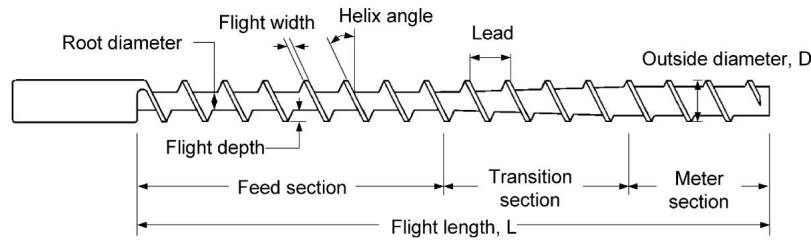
Typical geometries of a screw for single-screw extruder [3].
